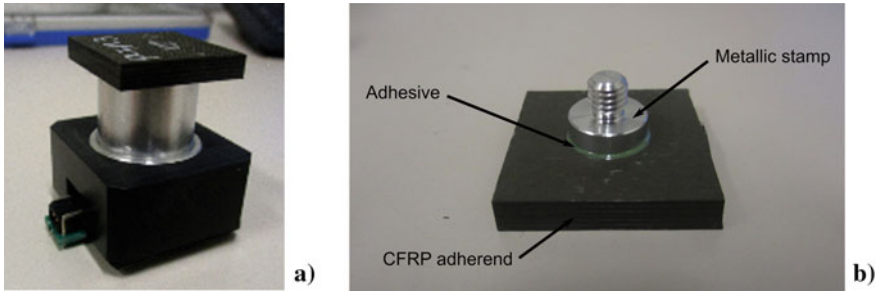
Photographs showing the stamp-to-plate specimen used in the centrifuge tests; a full specimen configuration and b metallic stamp bonded to the CFRP adherend
